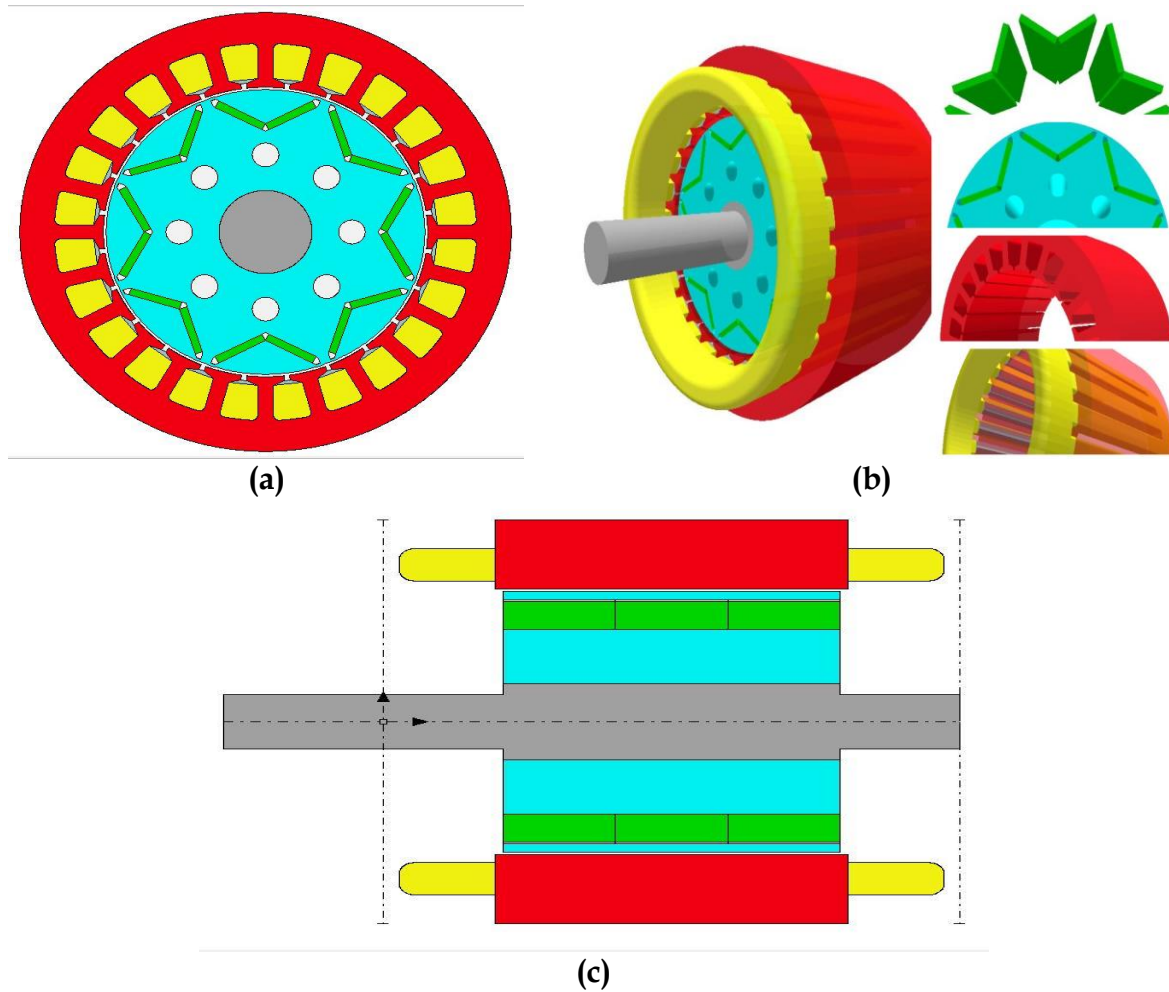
Radial, axial and three-dimensional views of IPM motor: (a) Radial aspect of motor 2D, (b) Aspects of 3D motor shape (Red: Stator, Yellow: Coil, Blue: Rotor, Green: Magnets), (c) Axial aspect of motor 2D.
